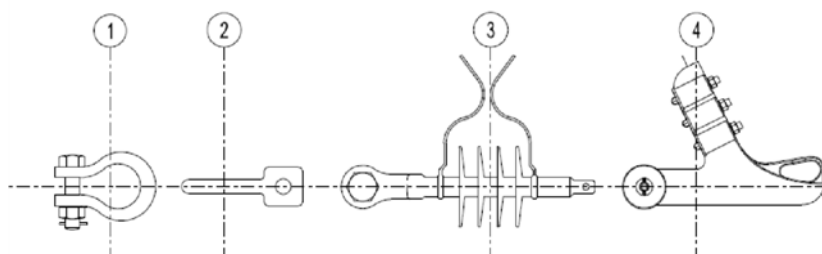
(Insulated Option) Shield wire strain assembly for single “7/3,35mm & 19/2.65”
